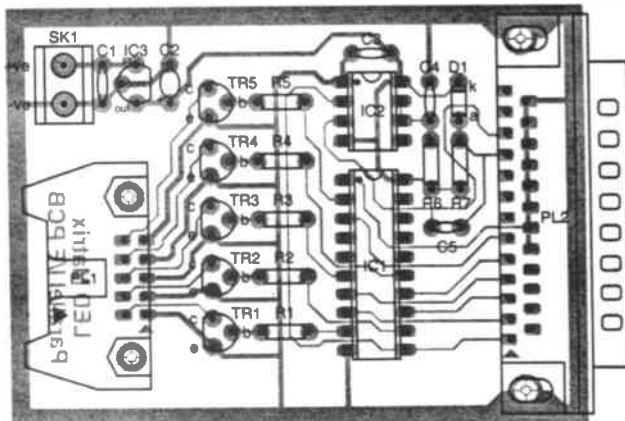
Interface printed circuit board component layout and full size copper foil master pattern.
